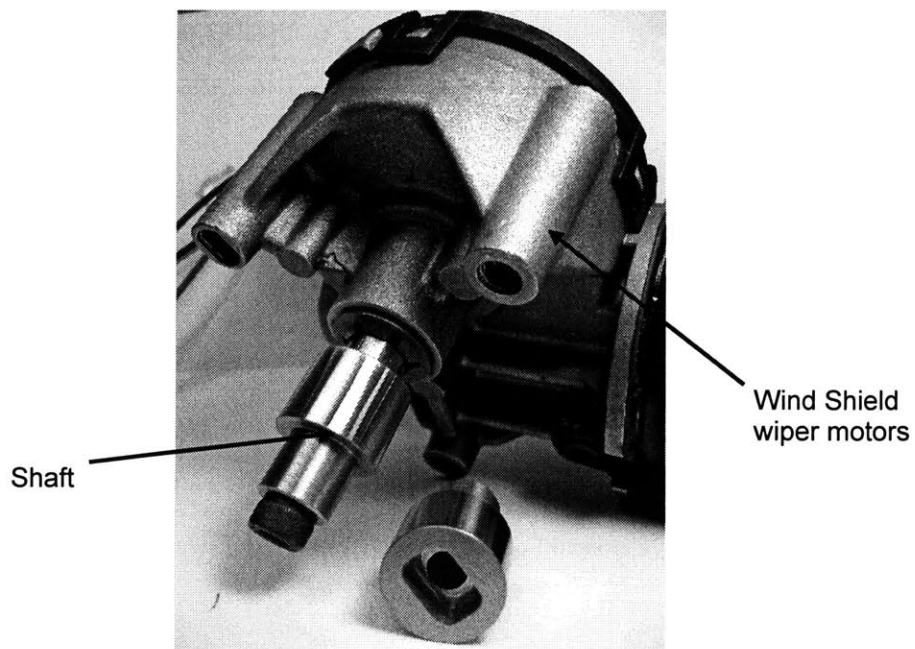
Shafts that fit tight to the wind shield wiper motor's output shaft
